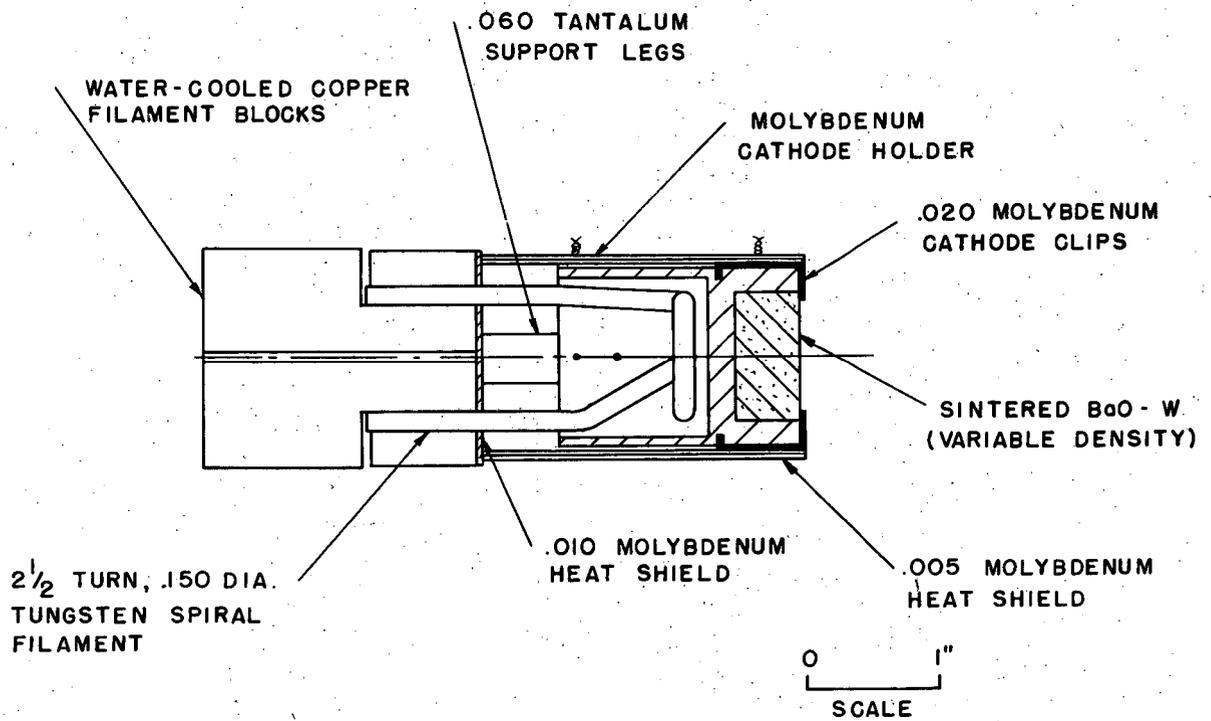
ASSEMBLY - 1" SINTERED BaO-W EMITTER
